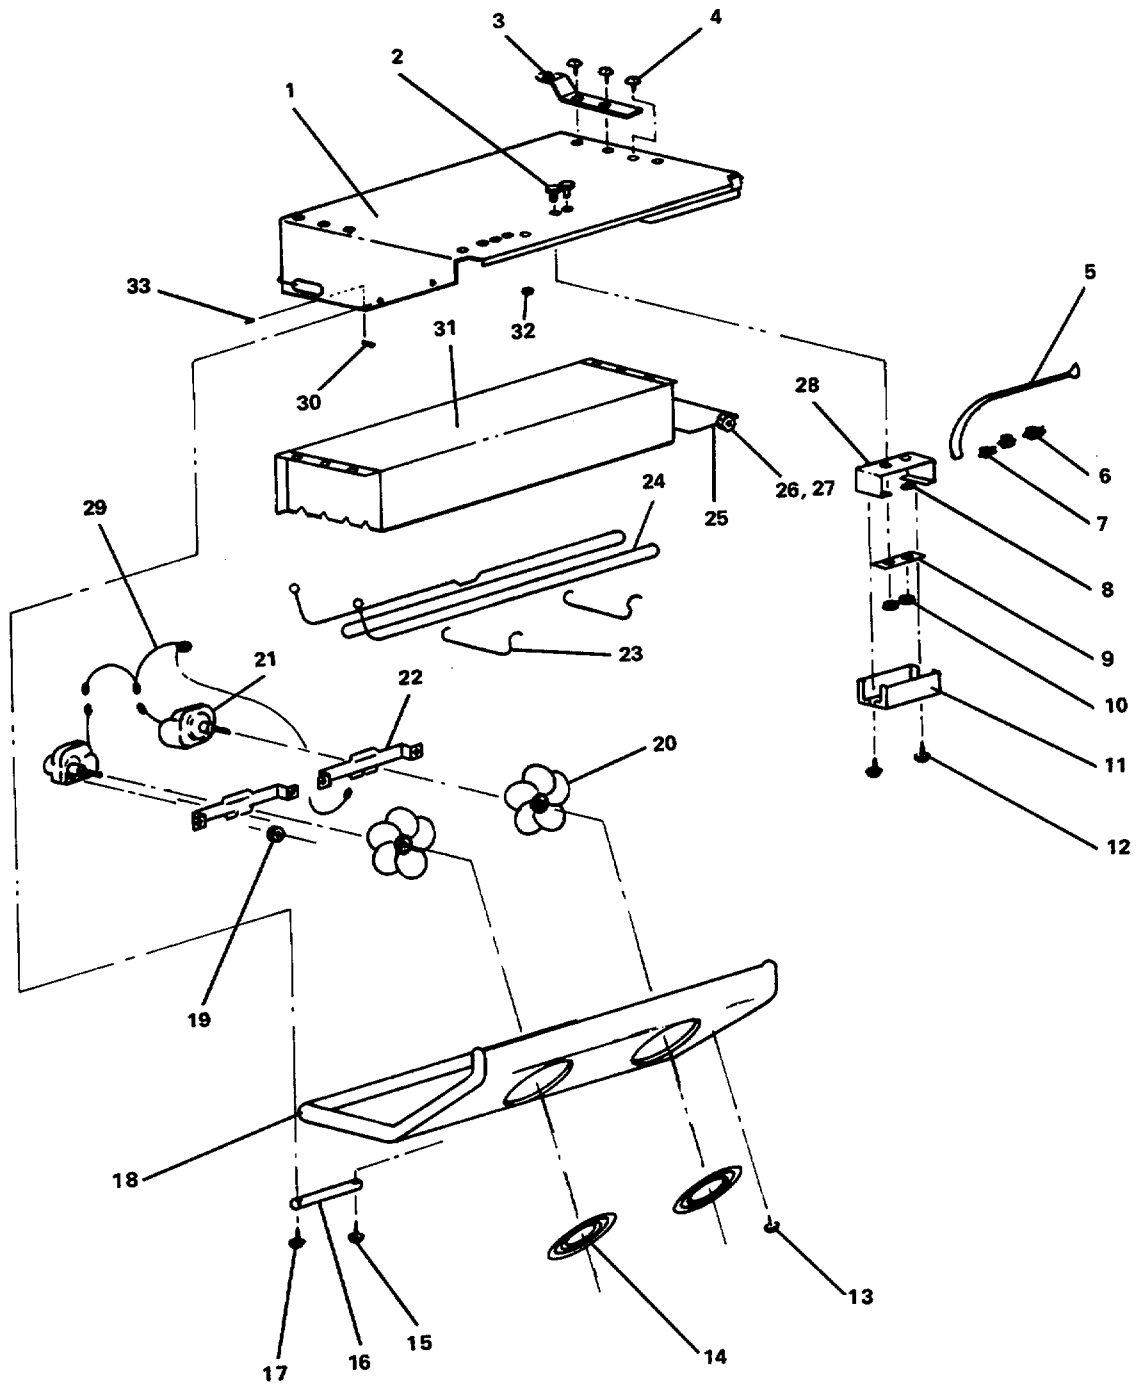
Repair F-20 Mechanical Freezer - Refrigeration Evaporator Coil.
